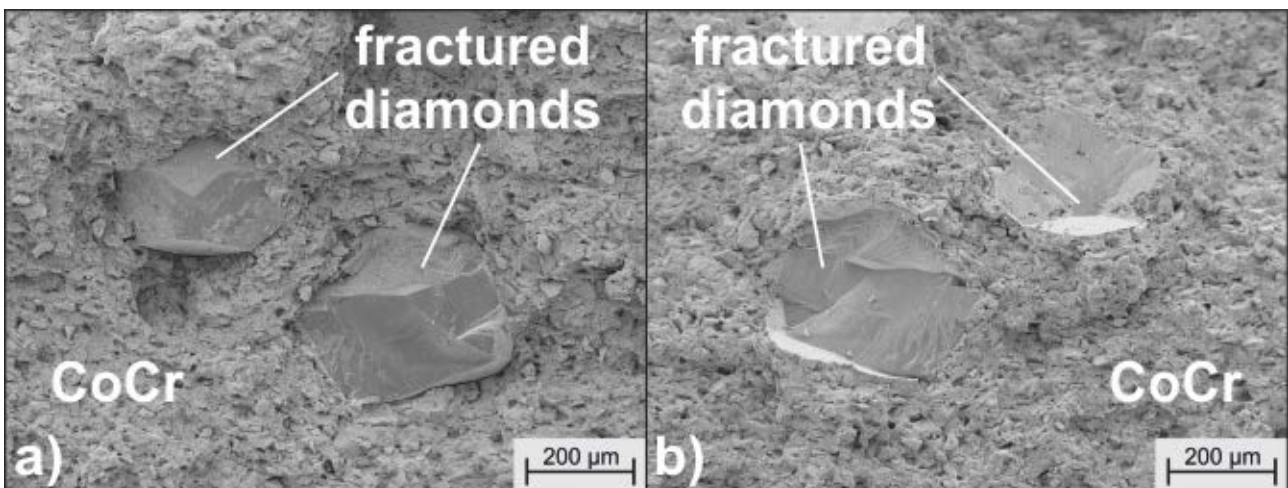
Fractured surfaces of hot pressed CoCr-based diamond segments
